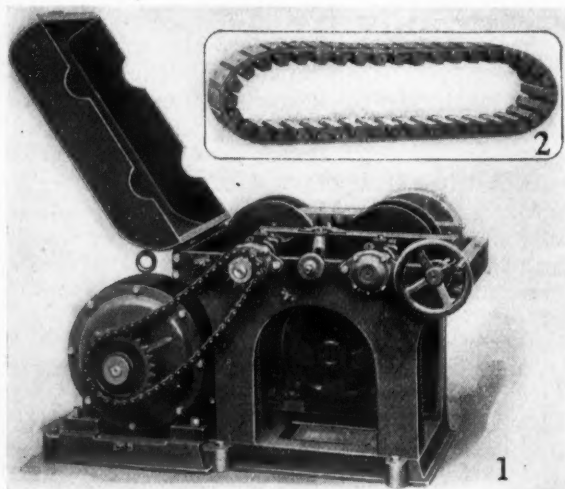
Variable speed reduction gear, incorporating Lewellen transmission, for conveyor line operation
